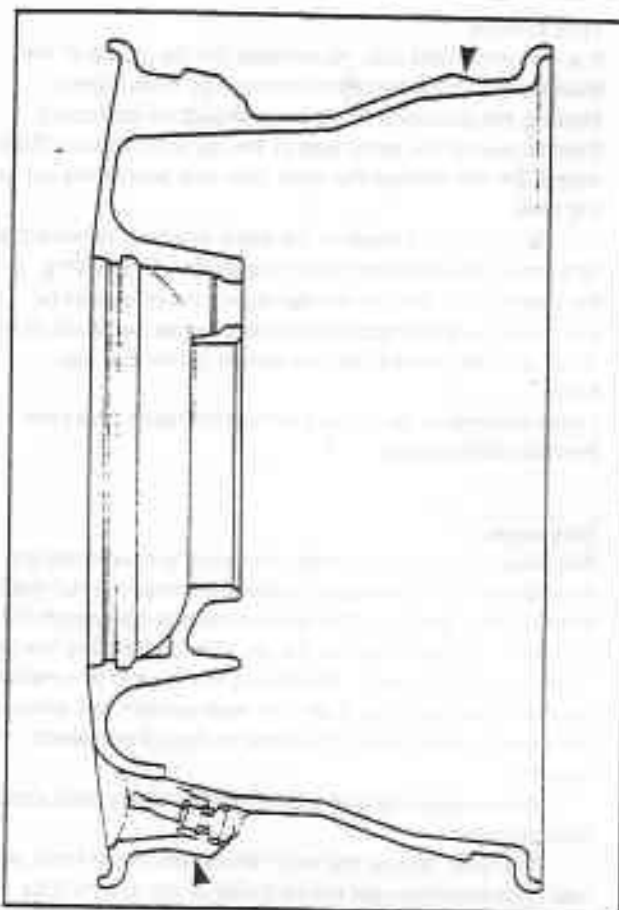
Sectional view of Bentley Turbo R wheel
